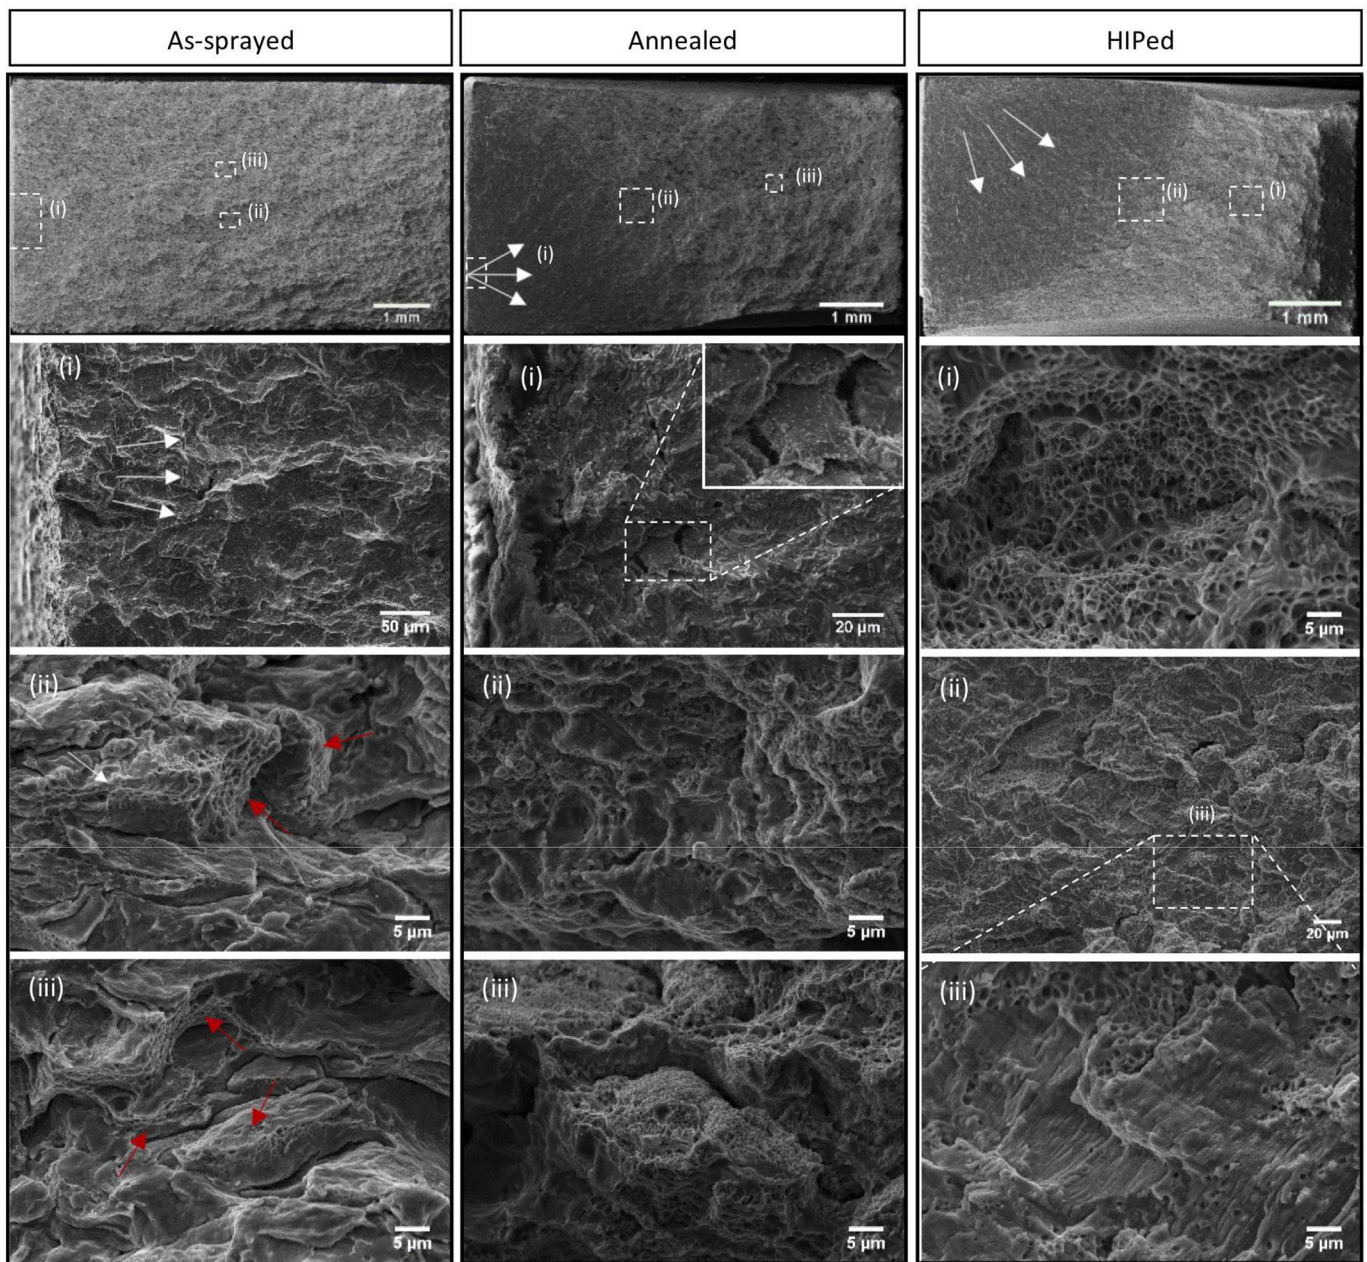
Fractography analysis of as-sprayed, annealed, and HIPed fatigue test samples. For the as-sprayed sample fracture surface (i) indicates initial defects with crack propagation direction highlighted by the white arrows, and (ii) & (iii) fracture surfaces with red arrows denoting limited presence of ductile dimples. For the annealed sample, the radial crack propagation direction is highlighted by the white arrows (i). Detail of initial defects indicate (ii) crack propagation in the fracture transition area, with visible presence of dimples, and (iii) fracture areas indicating notably plastic behavior and partly presence of dimples. For the HIPed sample, (i) radial crack propagation direction is highlighted by the white arrows. (ii) shows fracture areas with apparent plastic behavior and extensive presence of dimples. Details in (iii) show the propagation in the fracture transition area indicating striations referring to a stable crack propagation.
